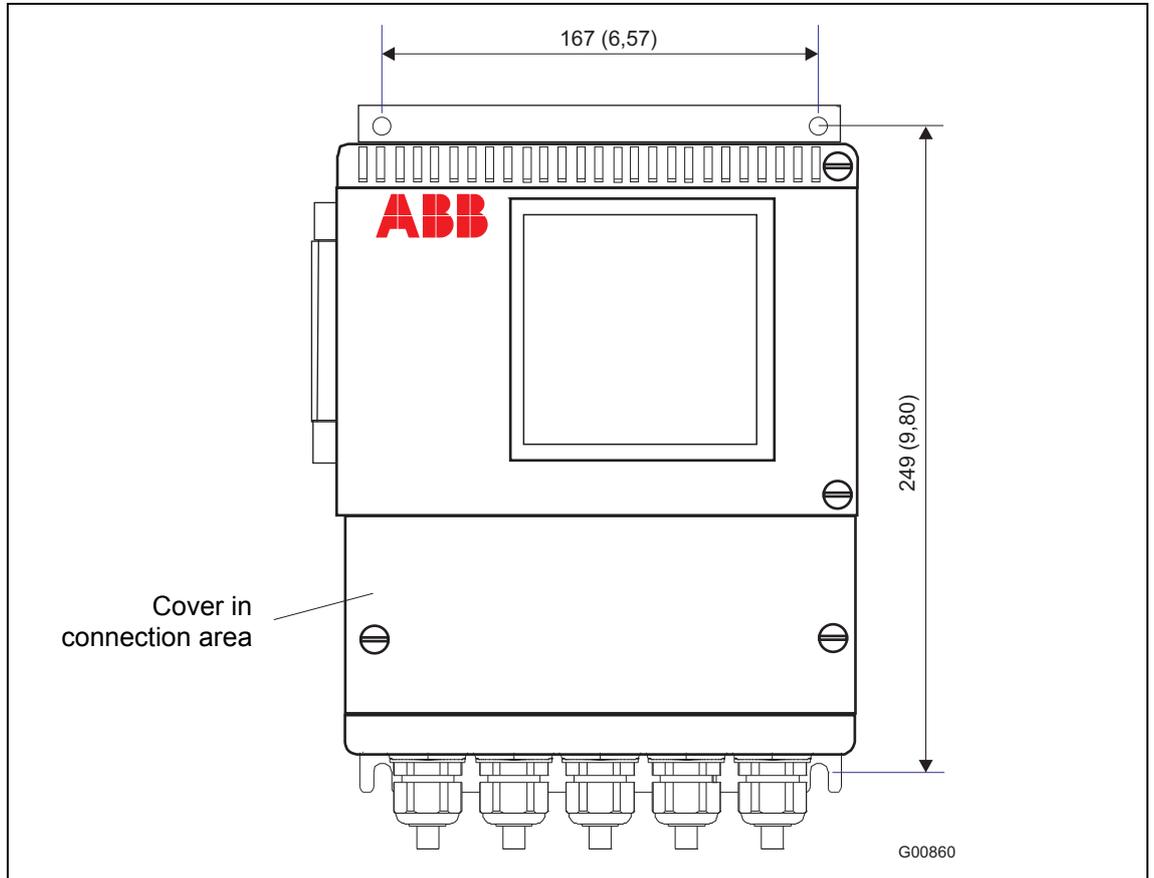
Dimensions in mm (inches). Wall-mounted housing, remote mount design
